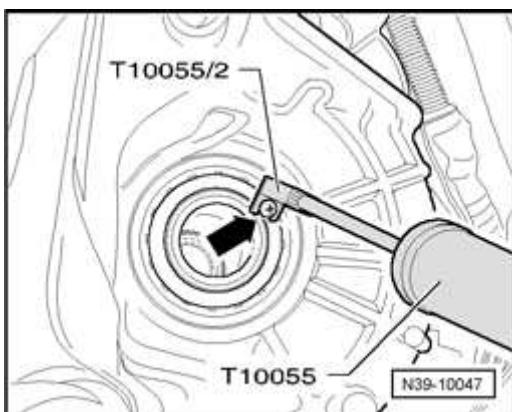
Install/Remove Metal Bolt At Drilled Hole Of Sealing Ring
